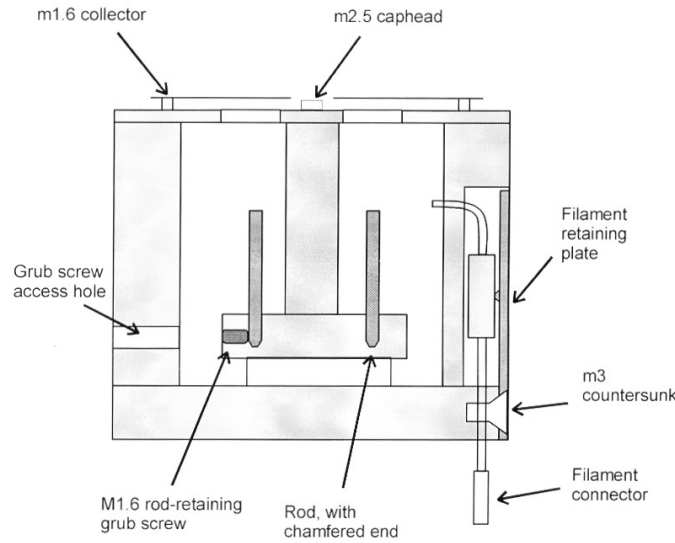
Electron Beam Evaporator, head assembly. The evaporation material is mounted as rods inside a copper assembly. Material may also be evaporated from 85 mm^3 crucibles which provide higher efficiency. The filaments are driven with currents up to 5 A allowing electron emission currents up to 100 mA. The electrons are accelerated through a high voltage of 2 kV. From the manual of Oxford mini e-beam evaporator [27].
